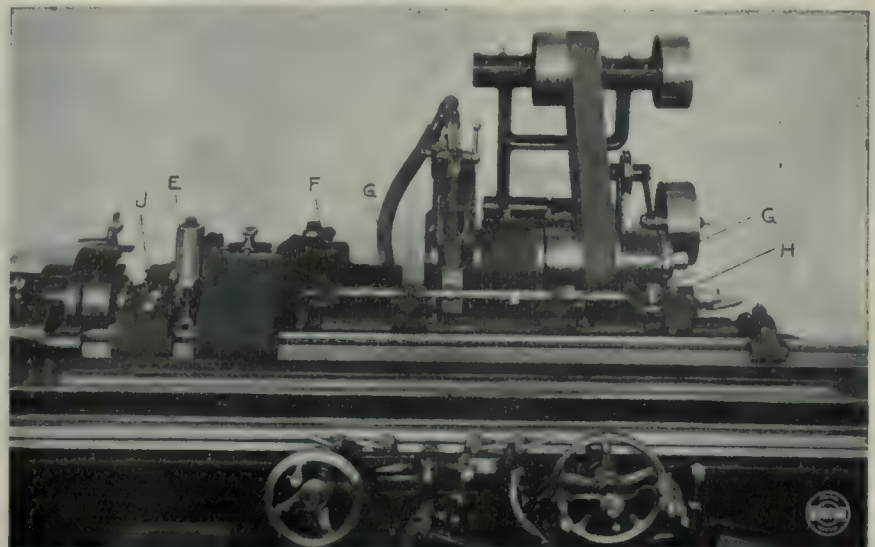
ATTACHMENT ON MACHINE IN OPERATING POSITION.
